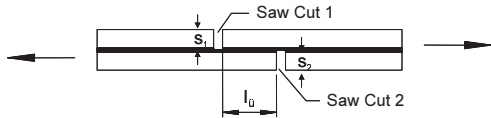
Tensile shear test specimen from a two-dimensional adhesive-bonded joint, overlapping length limited by saw cuts.
